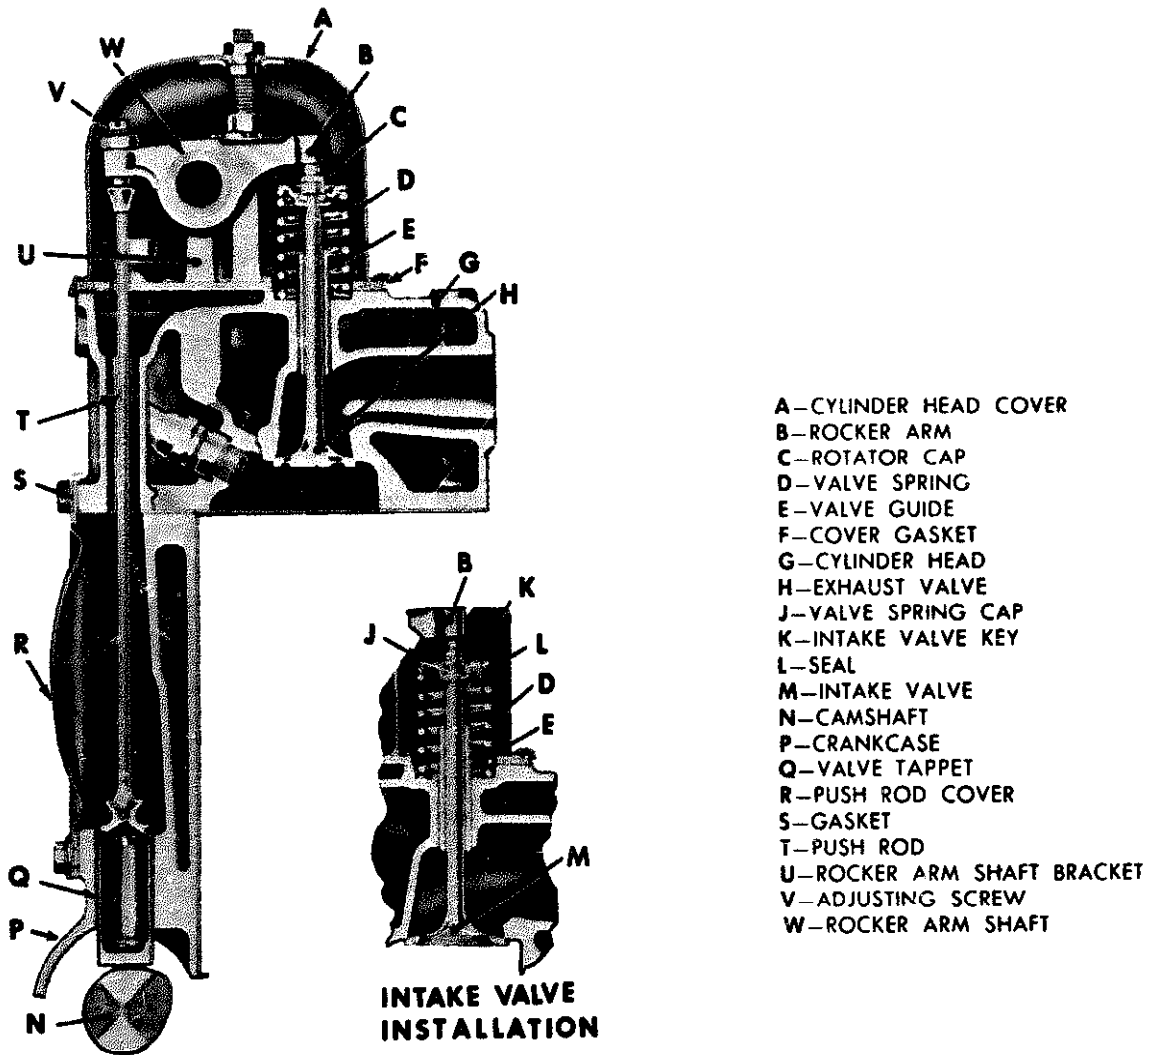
Valve operating mechanism for an overhead valve engine.
